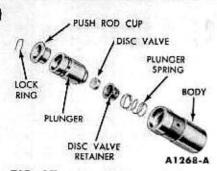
Typical Hydraulic Valve Lifter Assembly
